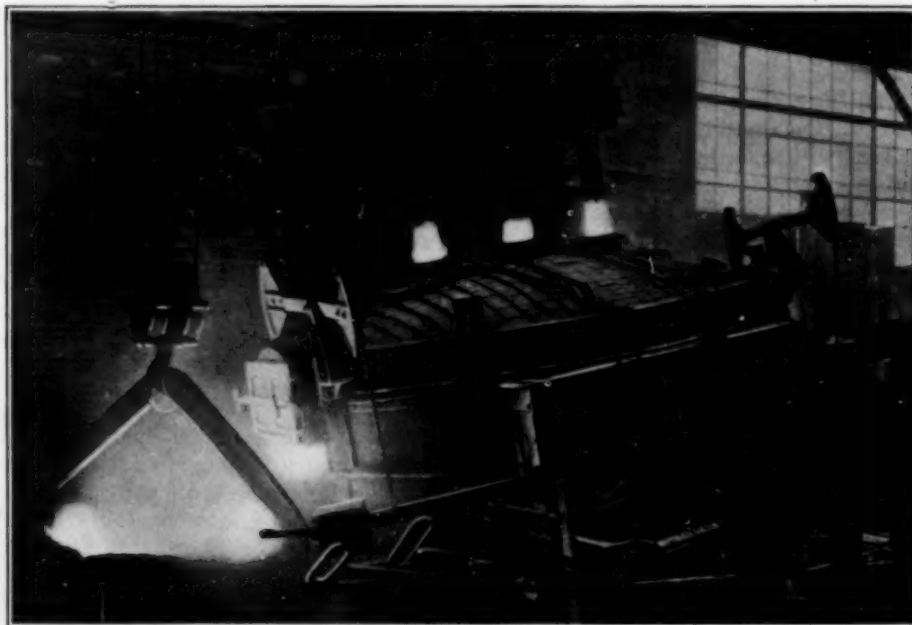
DISCHARGE OF 6-TON FURNACE AT THE HERCULES STEEL CASTING CO. PLANT
